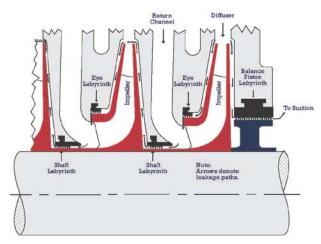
Partial Section Through a Typical Centrifugal Compressor Illustrating Eye, Shaft, and Balance Piston Seals as Well as Typical Leakage Paths.
